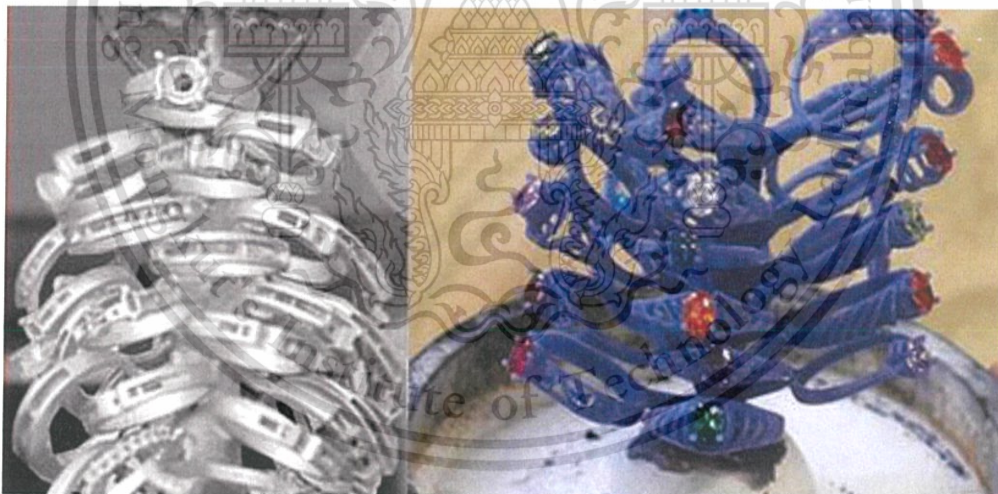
A casting tree with numerous ring patterns after removing a plaster mold
